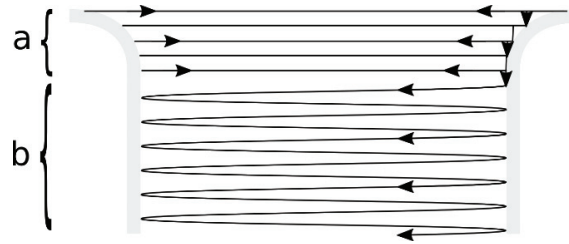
Schema of the tool path: (a) z-level trajectory for the conical frustum; (b) cylindrical helical path.
